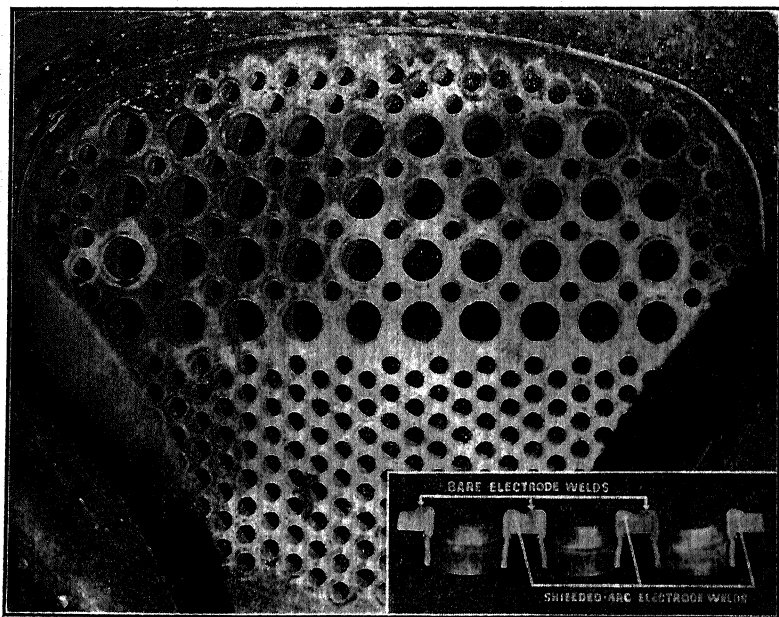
A set of locomotive boiler flues welded to back flue sheet by shielded arc welding. The inset shows a test specimen with the welds on the left-hand half made with bare electrode, and those on the right-hand half made with shielded arc electrode. The latter beads are denser and hence more resistant to corrosion.
